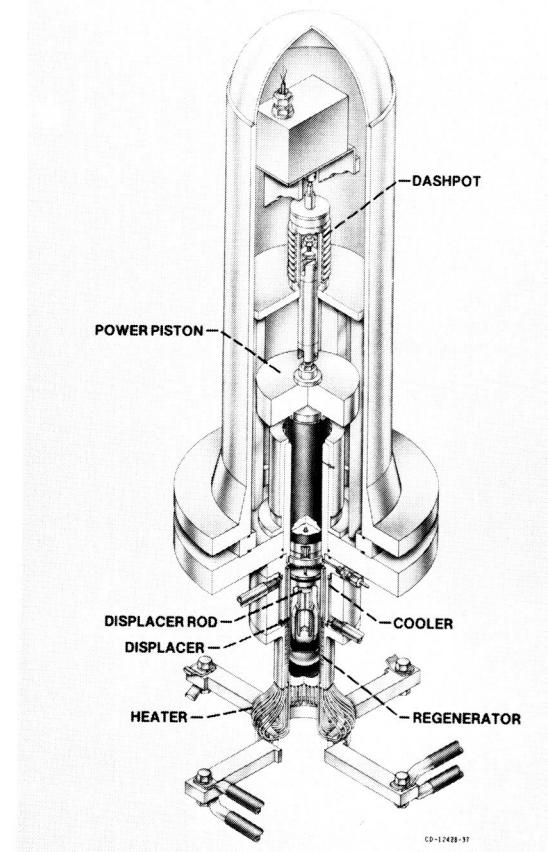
COMPONENT LAYOUT OF RE-1000 FREE PISTON STIRLING ENGINE.
